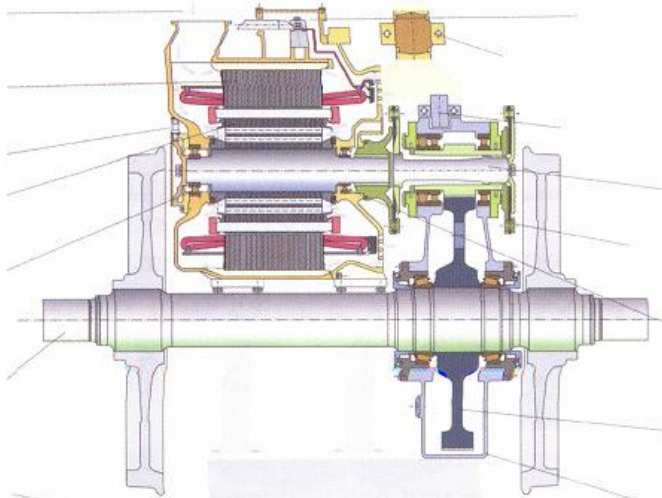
Partially sprung Vectron locomotive drive scheme [10]
